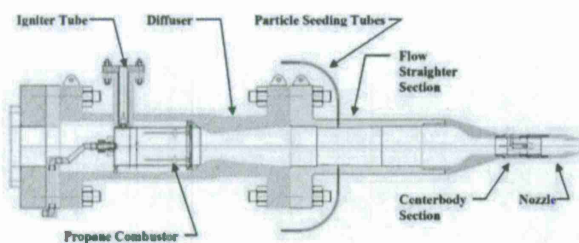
Illustration of the propane burner system and nozzle assembly.
